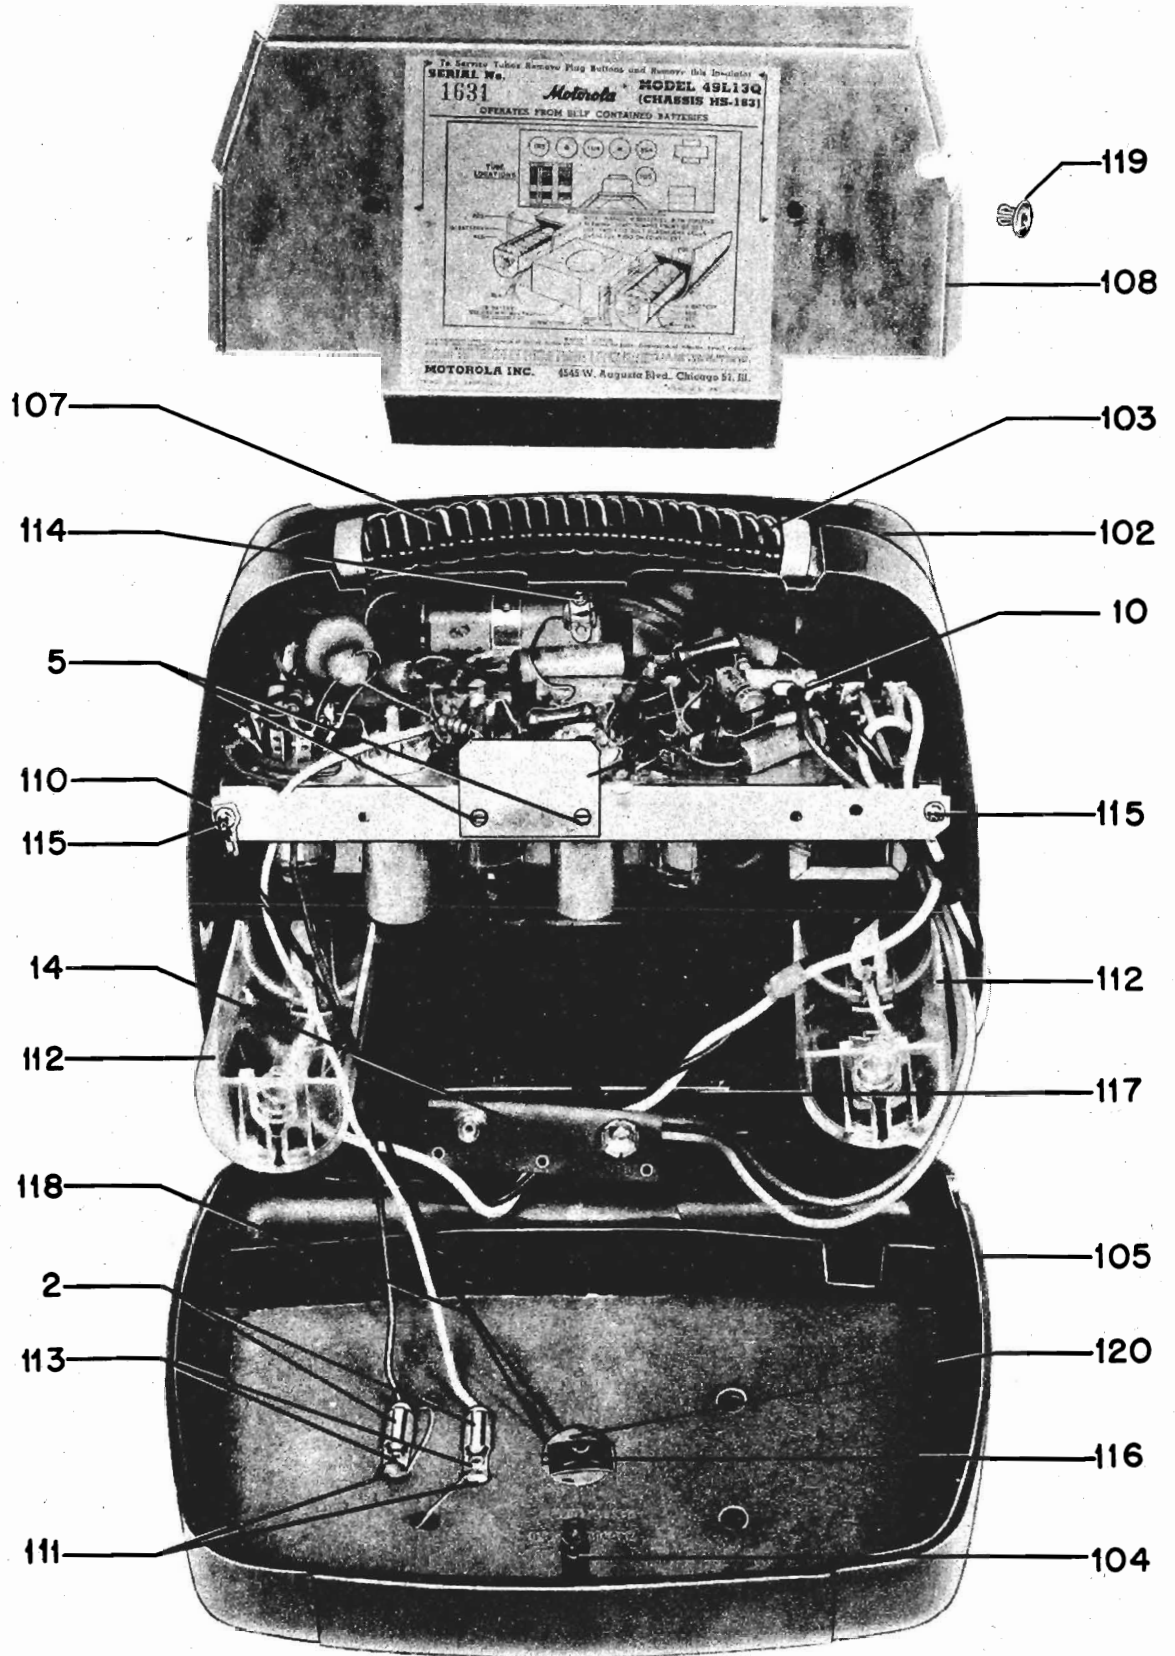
PARTS LOCATION - CABINET REAR VIEW
